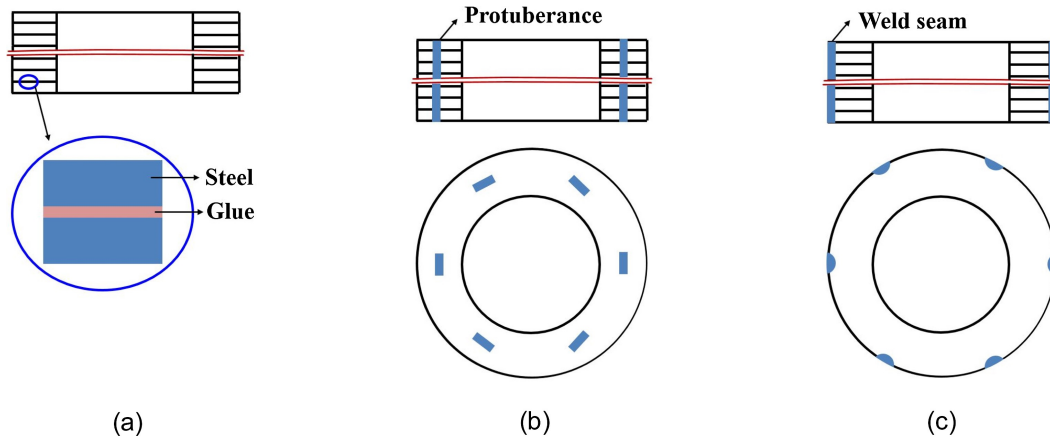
Three joining methods of laminated electric steel: (a) adhesive bonding (b) mechanical bonding (c) welding [28]
